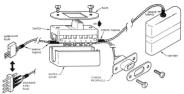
Complete Battery and Harness Assembly (\$540-P500 shown)
